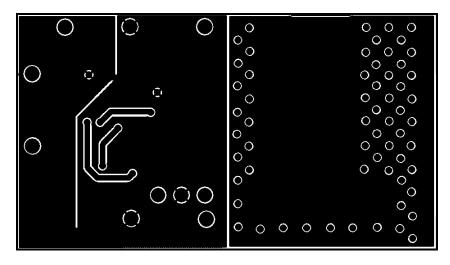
SP6137LEDEB PC LAYOUT BOTTOM SIDE
